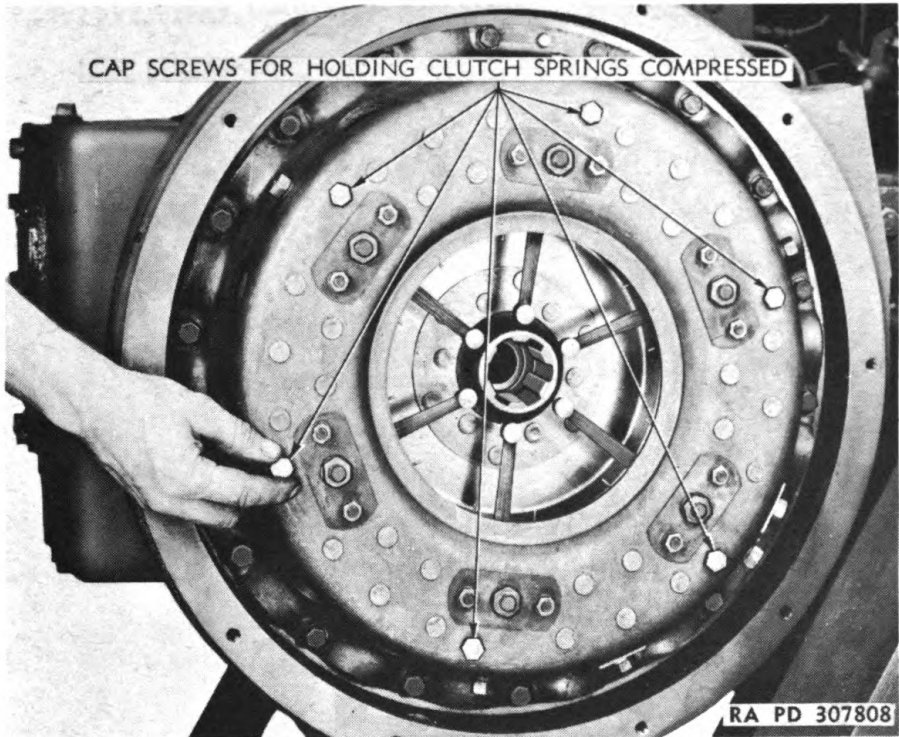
Installing Cap Screws To Hold Clutch Springs Compressed
